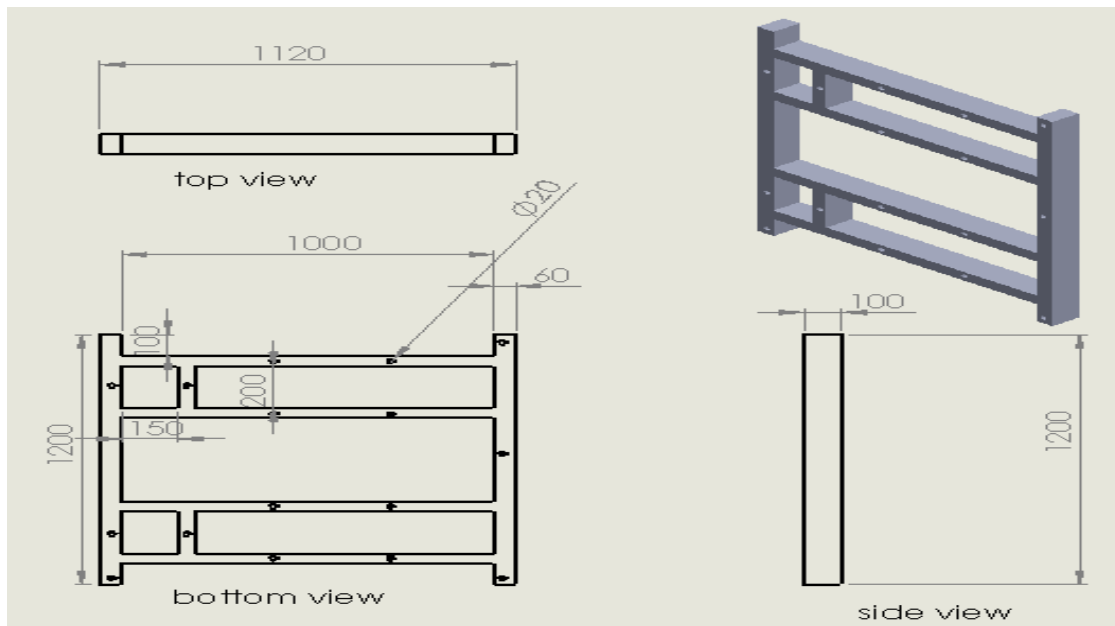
Isometric view of main frame (all dimensions are in mm)
